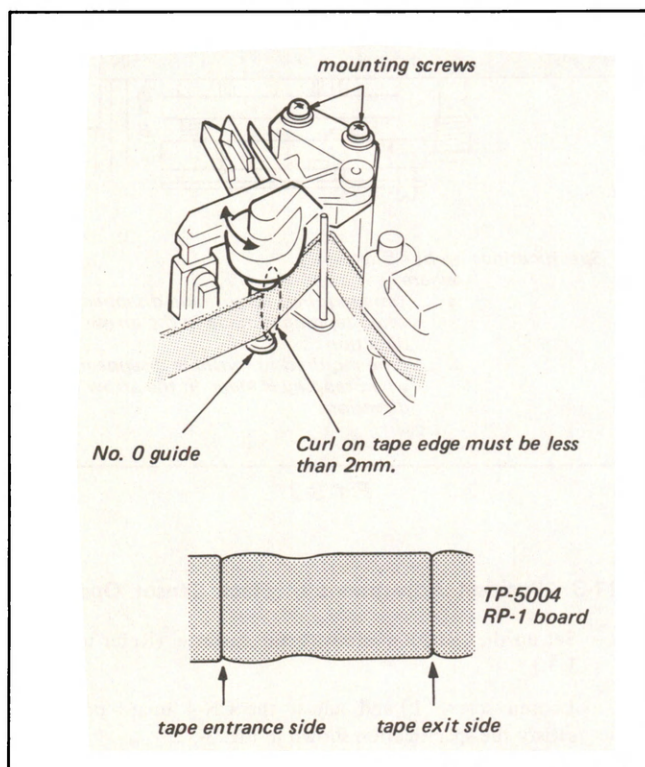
Position adjustment of No.0 guide section assembly mounting
